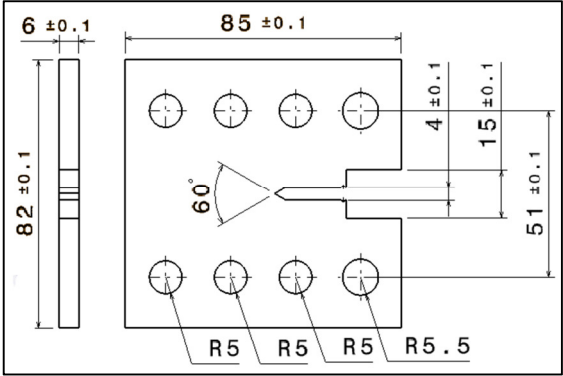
Geometry and design dimensions of modified CT (MCT) specimen.
